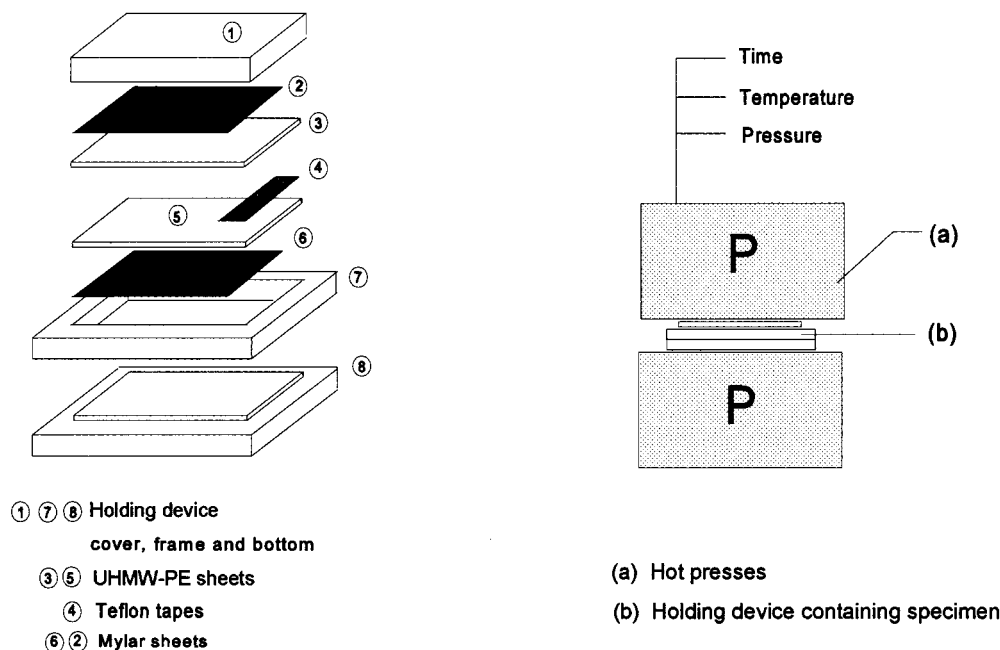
Holding device used to position the UHMWPE films during welding.
